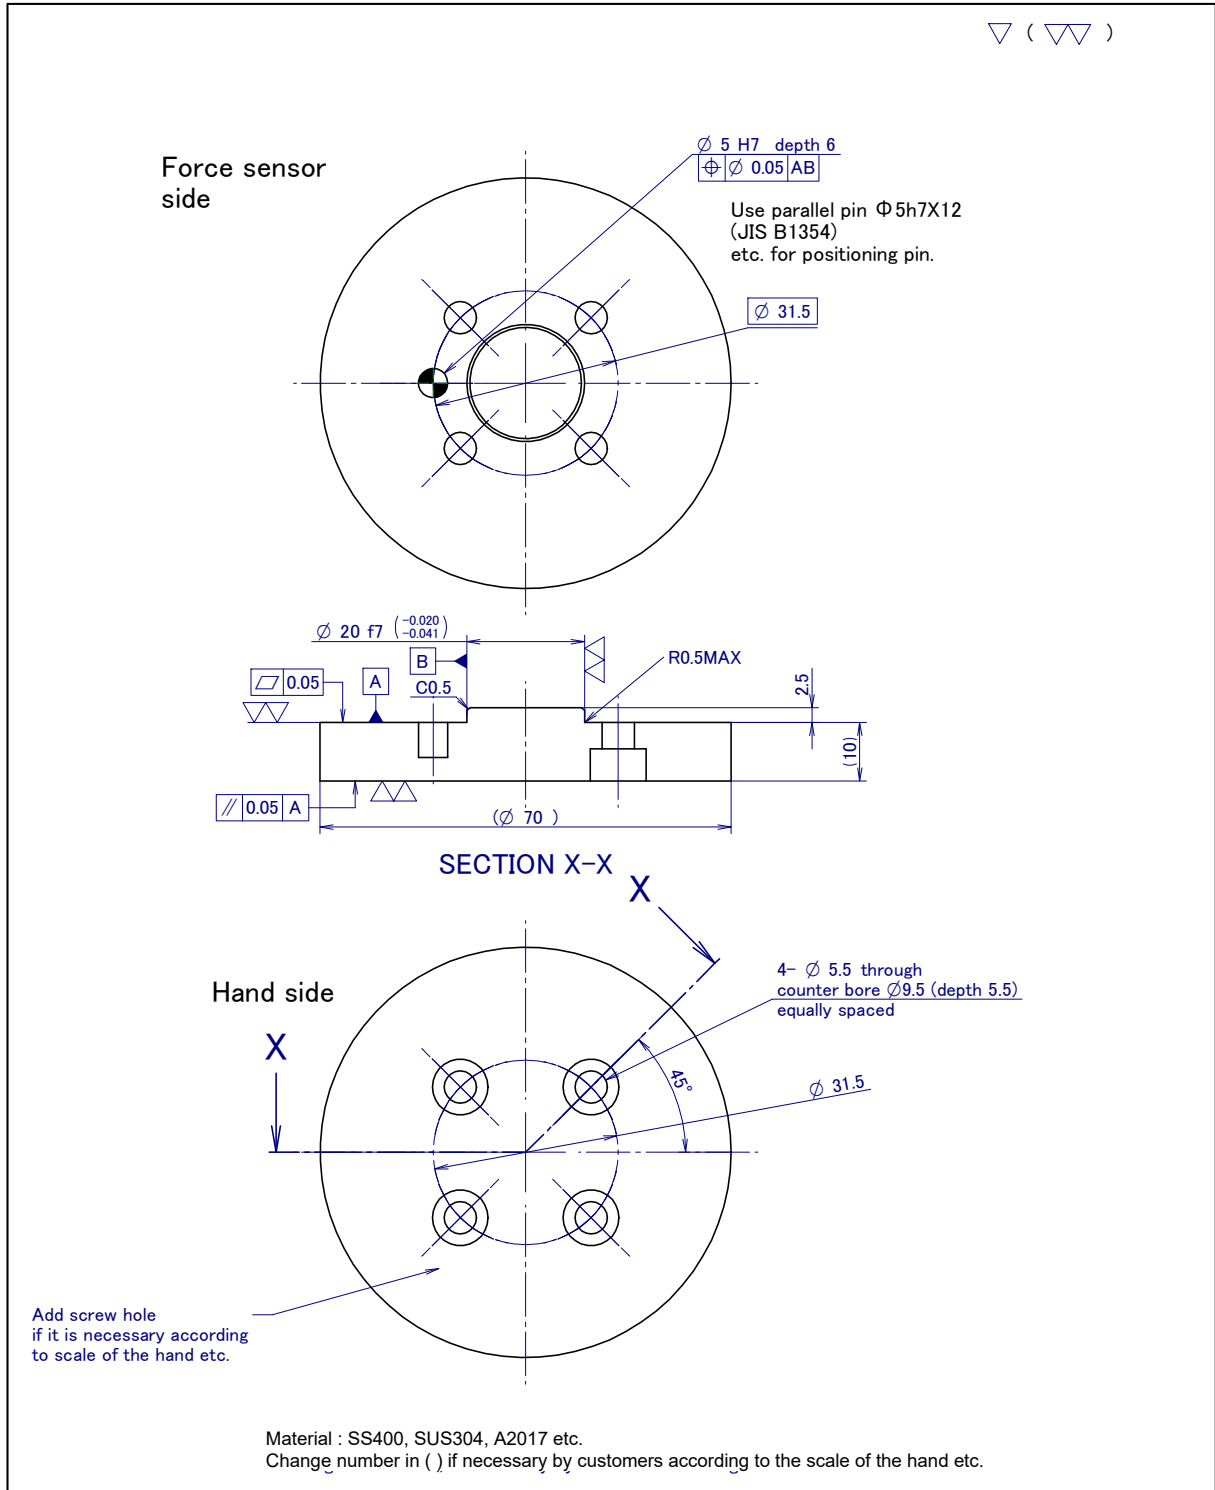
(a) Example of designing the hand mounting adapter (FS-15iA, FS-15iAe)
